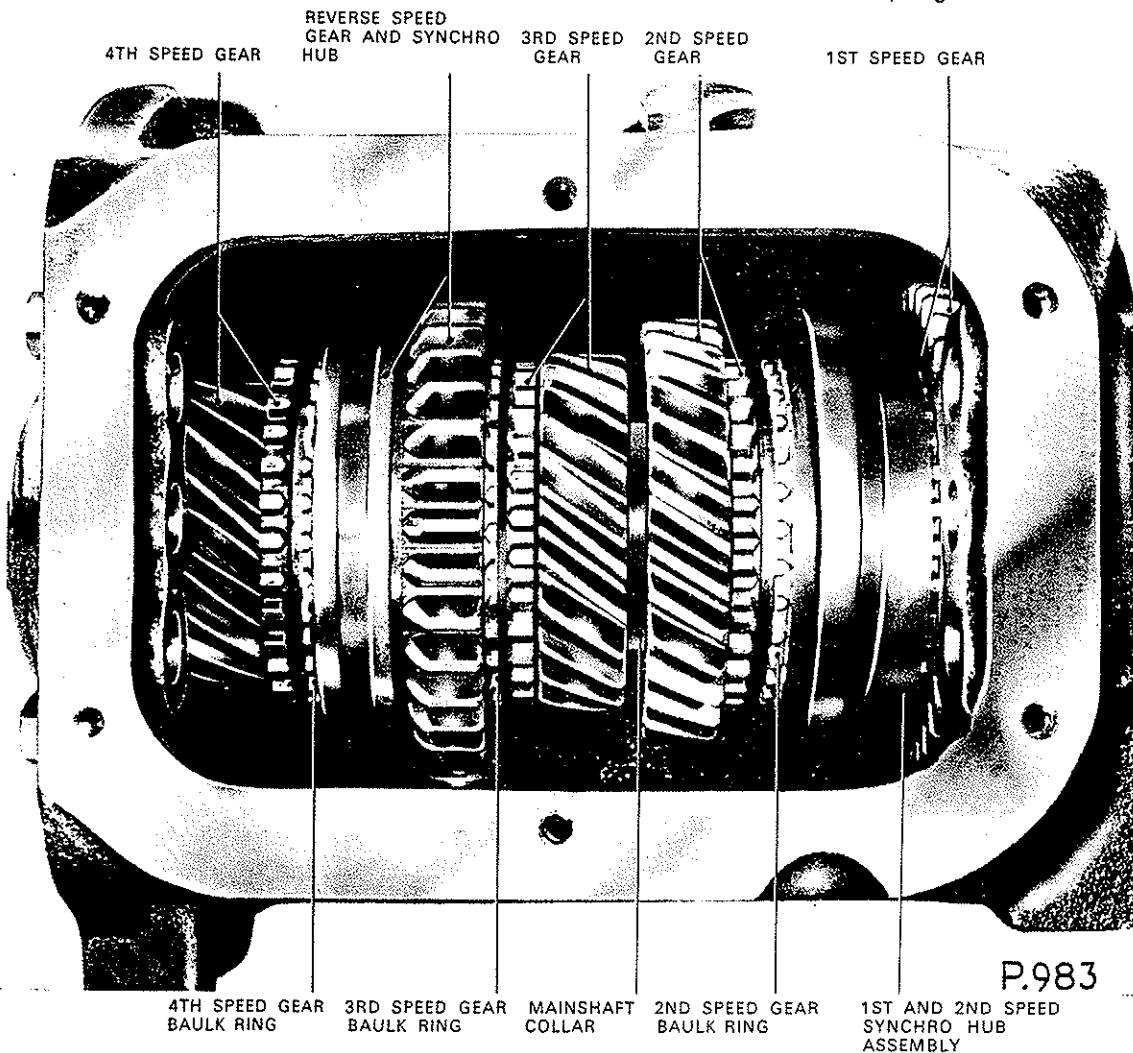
View of the mainshaft assembled in the gearbox casing
